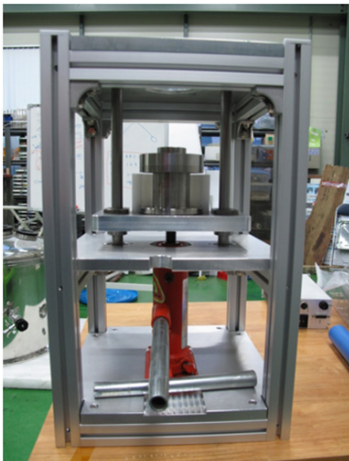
Assembly equipment of a superconductor bearing rotor for a stiffness test.
